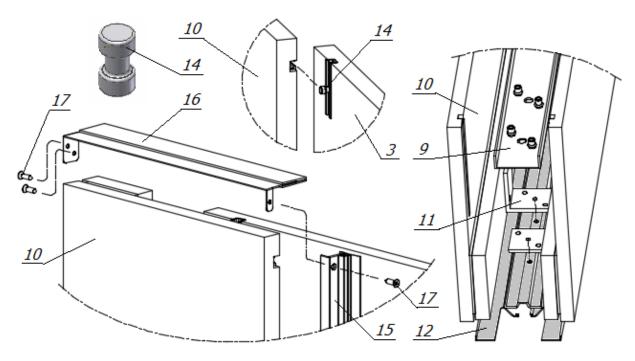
Assembly of the plates of the withdrawable part with cooperating elements
